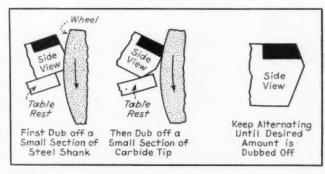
ALTERNATE GRINDING ON CARBIDE TIP AND STEEL SHANK
